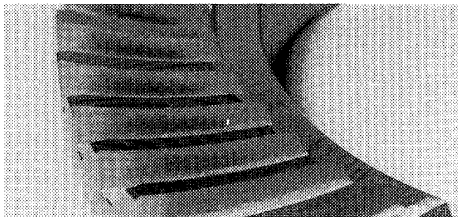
Real tooth bearing on gear tooth surface of convex side
